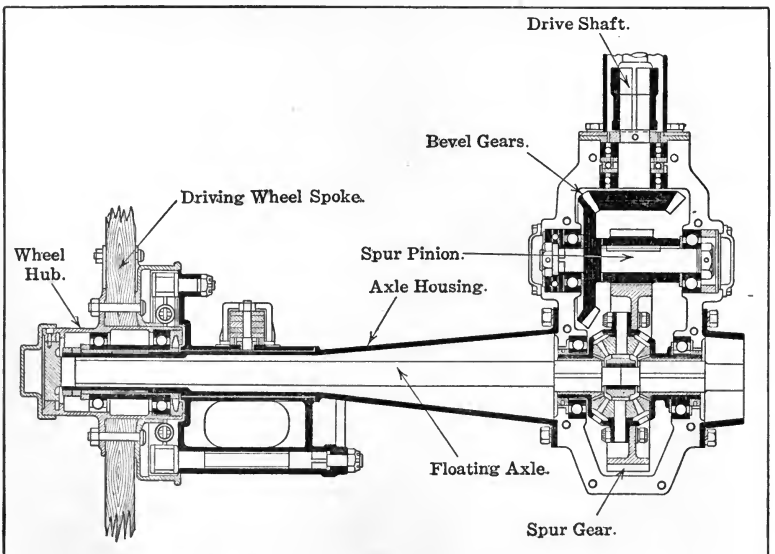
Live Rear Axle with Combined Bevel-and Spur-Gear Final Drive.
